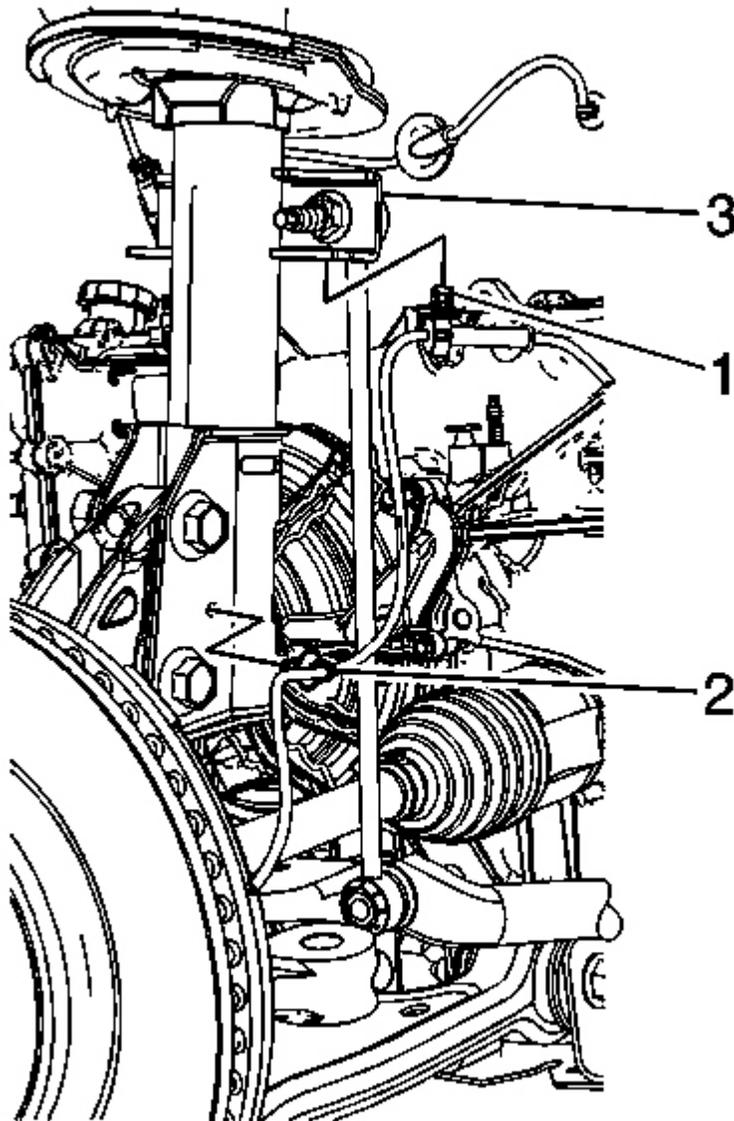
Identifying Wheel Speed Sensor Wiring Harness & Front Strut
